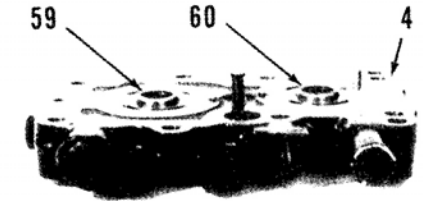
Install pump side needle bearing (59) and motor side needle bearing (60) with marked side protruding 35 mm (9/64 inch) above port block (4) machined surface.
